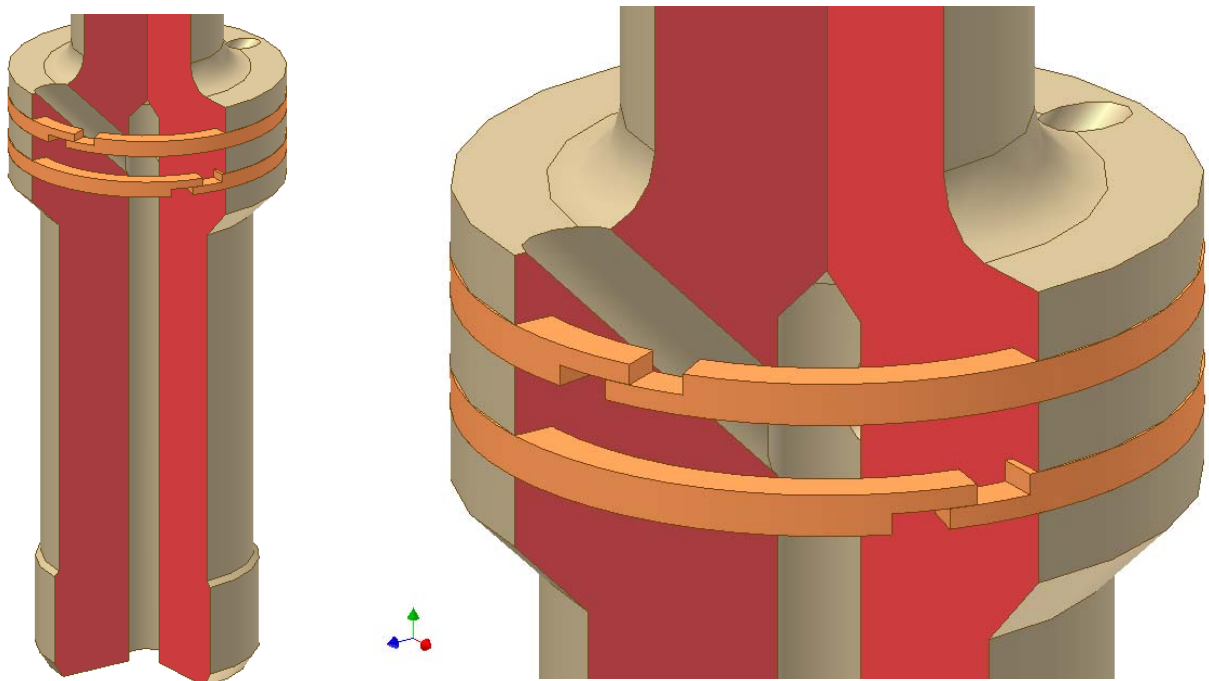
Pressure Balanced Sleeve with metal seals, showing pathways through plug and joining of metal seals.
